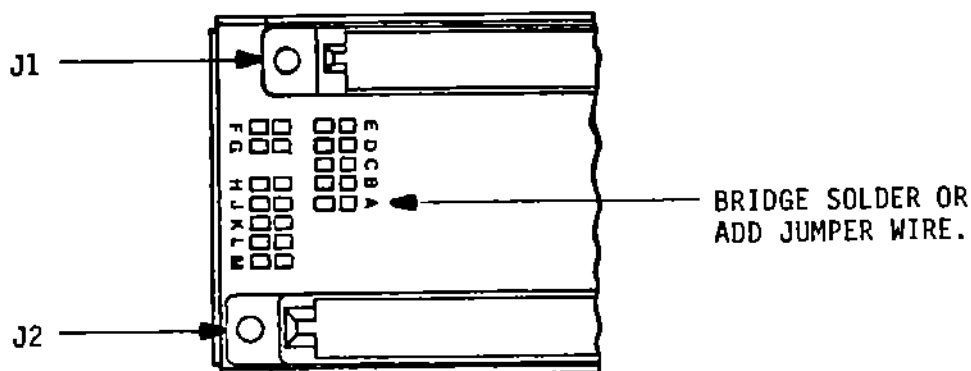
PA80 Solder-Bridge Jumper Locations
